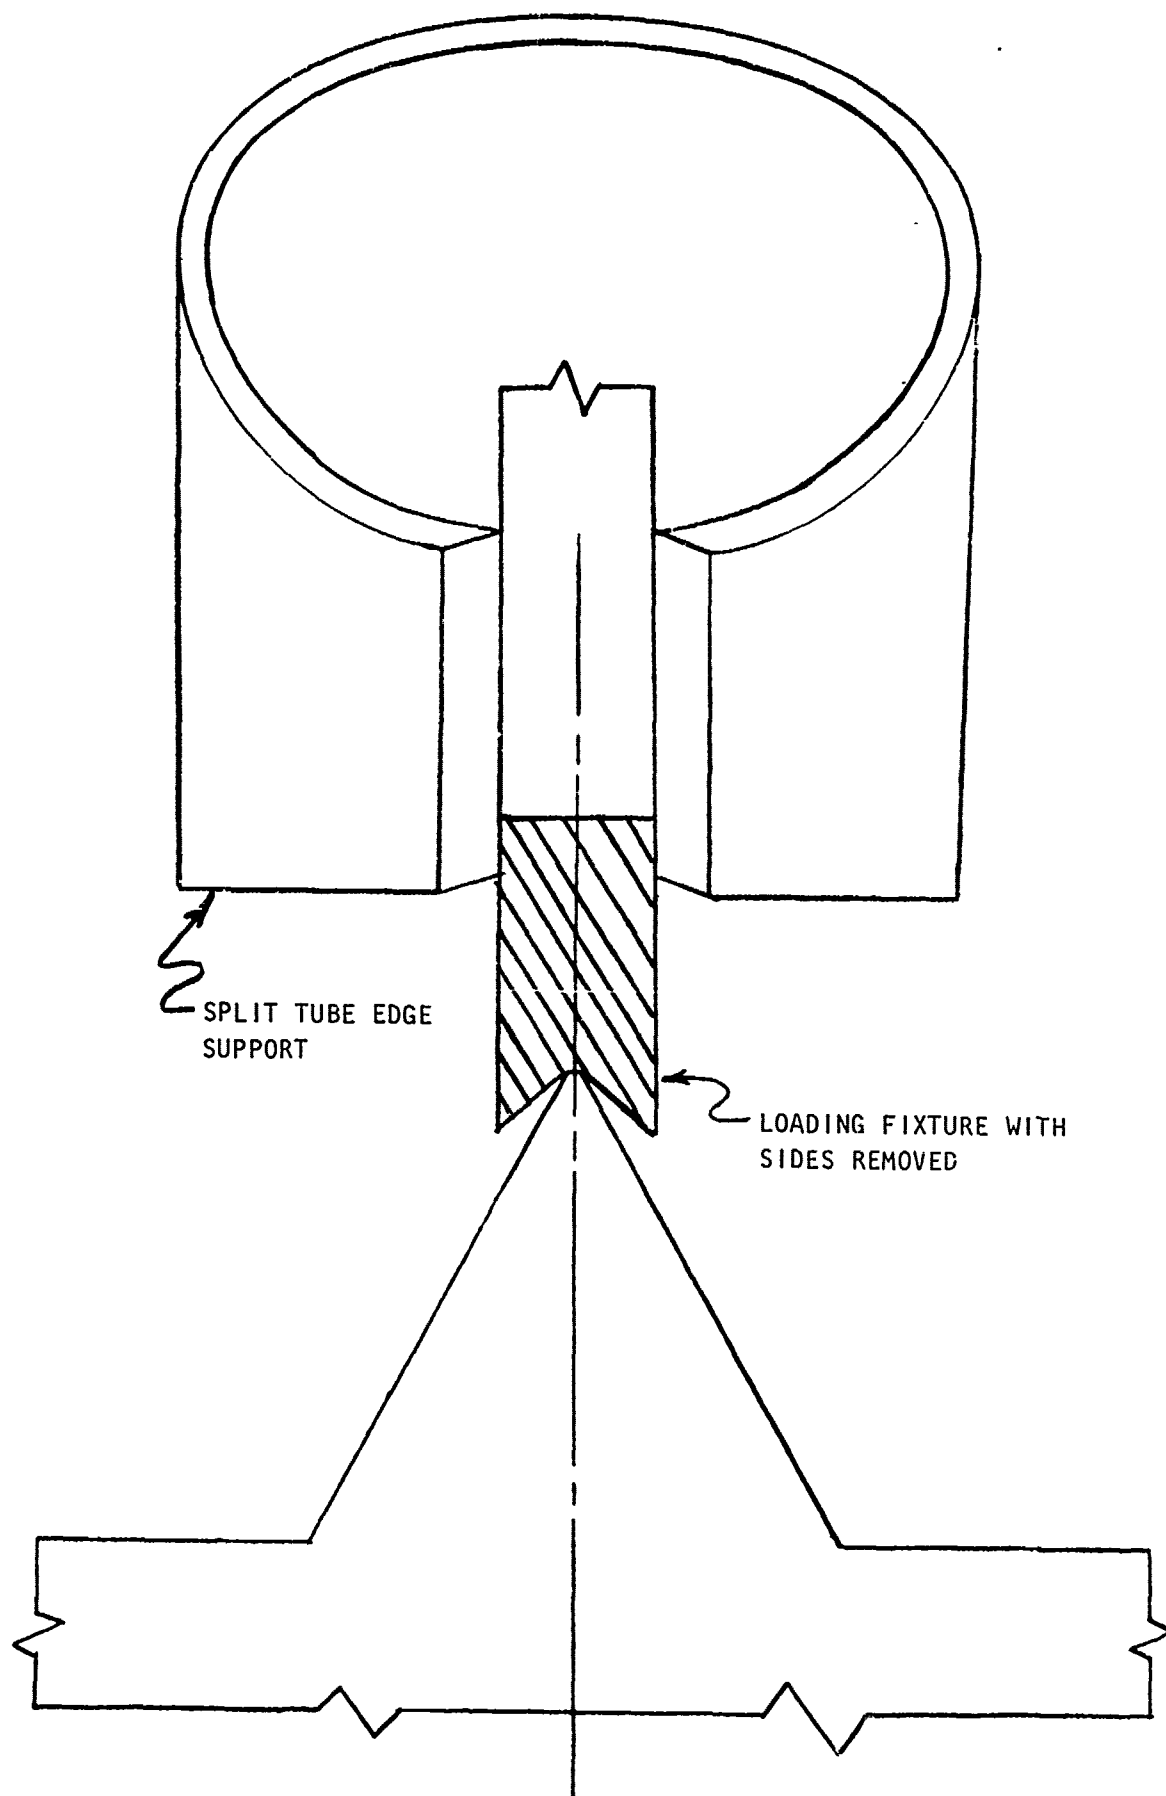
Modified End of Loading Fixture to Accommodate Edge Tube
